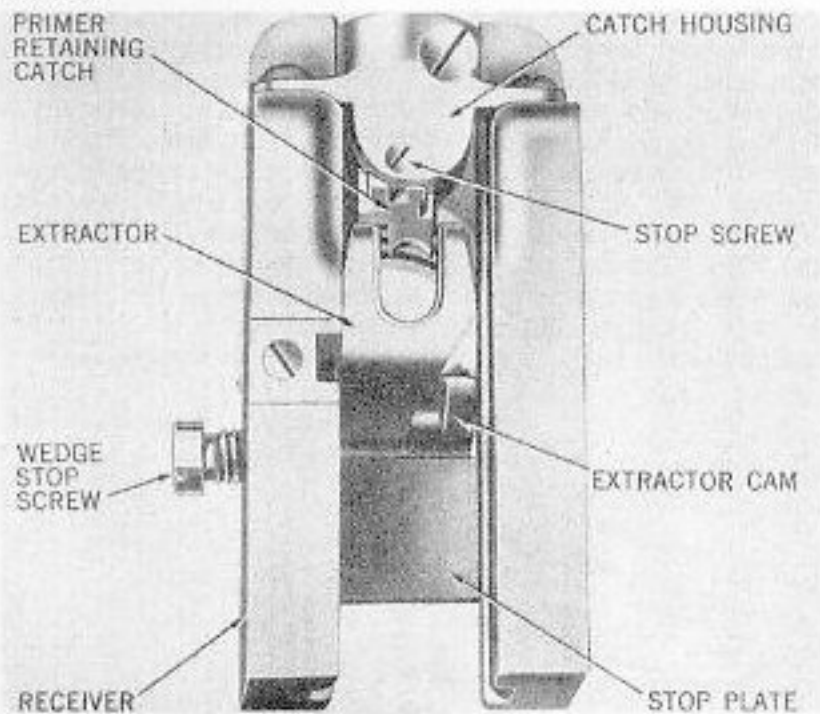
Firing Lock Mk 14 Mod 5 - Wedge Removed
